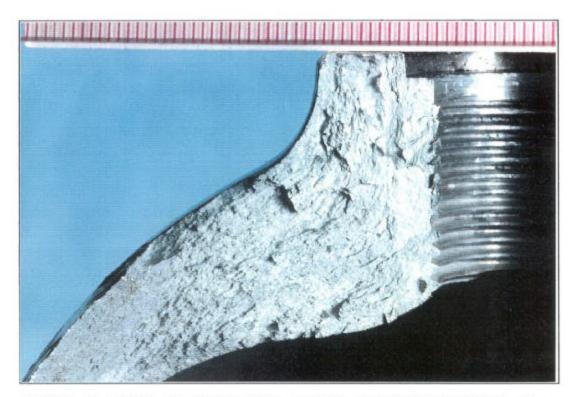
CLOSE UP PHOTOGRAPH OF THE CRACKED REGION OF THE CYLINDER HEAD -- ITEM 3A
